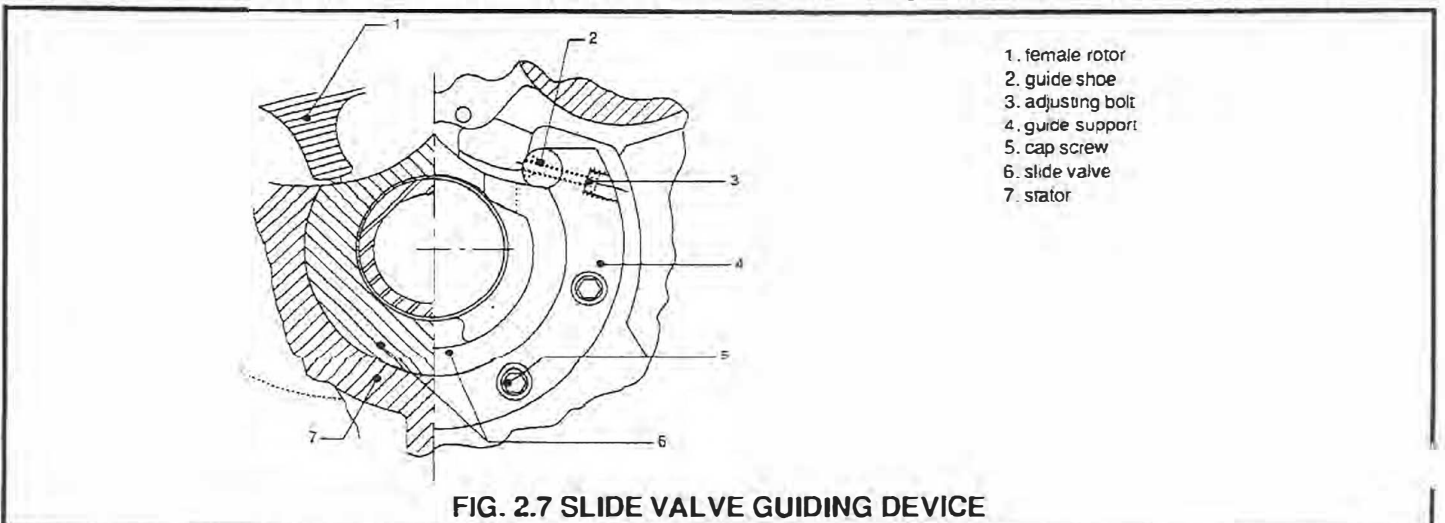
SLIDE VALVE GUIDING DEVICE
